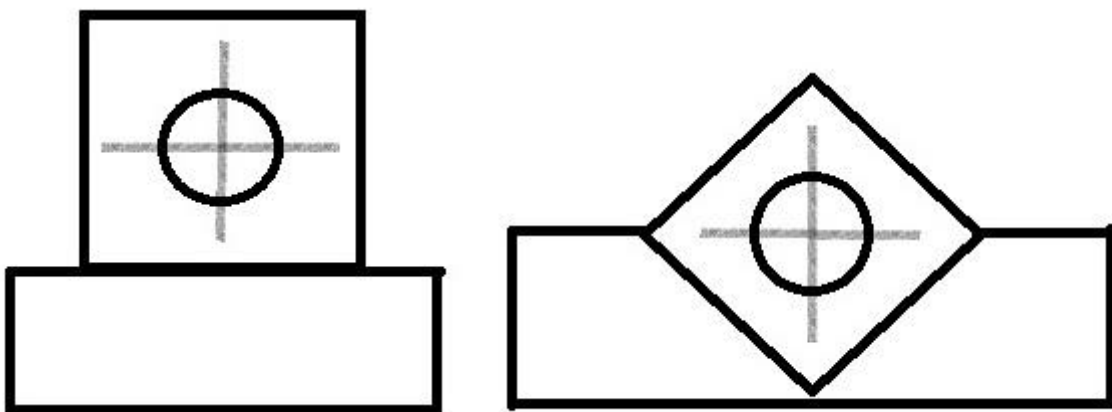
Position of Magnetic Exciters Housing on V-shape Mount
